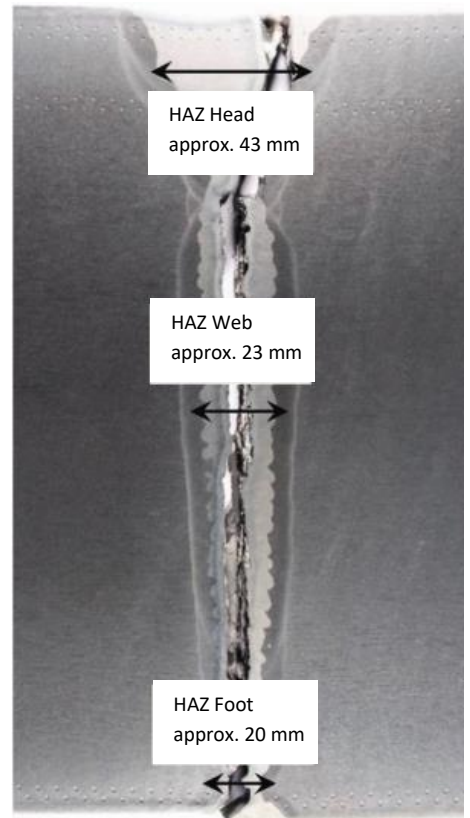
Minimising weak points: The GMAW process reduces the heat affected zone by 50 per cent compared to thermite welding.
